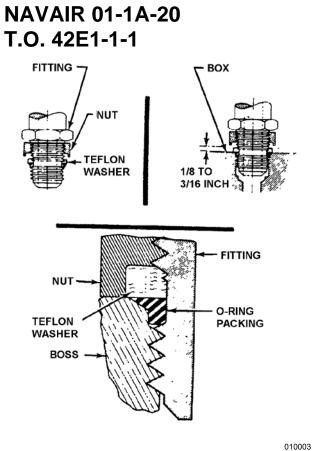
Combination Bulkhead and Universal Fitting Assembly
